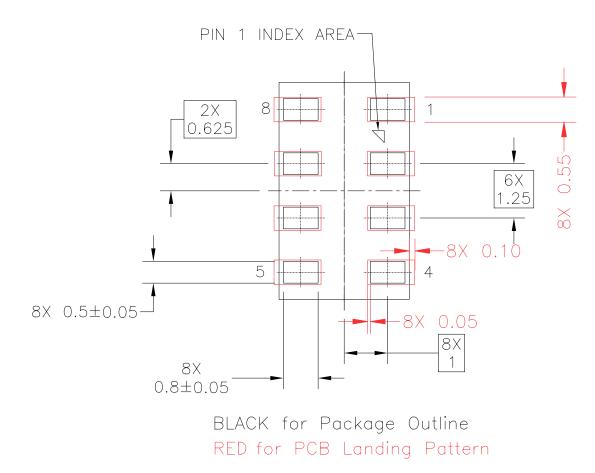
MPL115A2 Recommended PCB Landing Pattern
